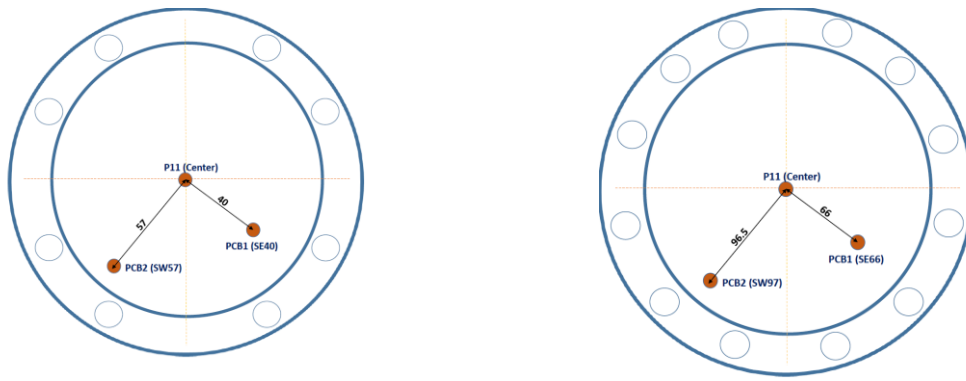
Pressure transducers locations on a full flange corresponding to cylindrical adapter (left) and conical adapter (right). The dimensions are given in mm.
